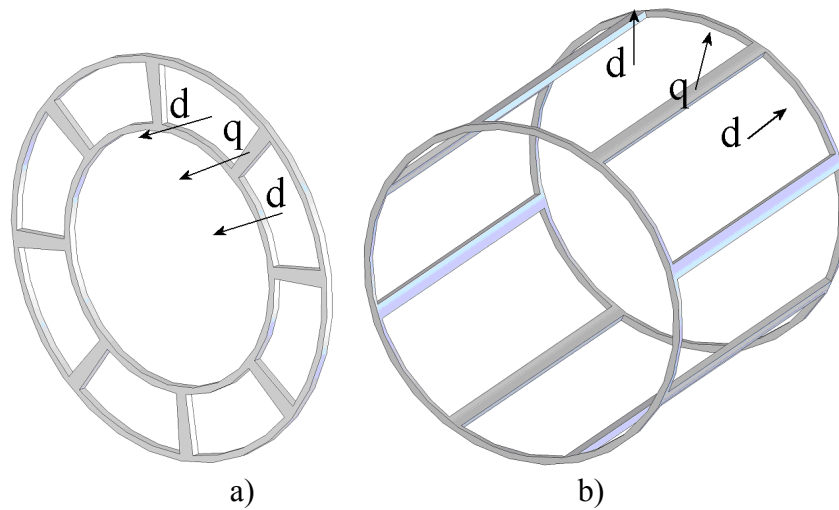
Installation jigs for permanent magnets for a) axial and b) radial flux permanent magnet synchronous machines. Installation jig forms a coarse squirrel cage provided with end rings. Note that in such a case the damper bars surrounding the d-axis are effective but the q-axis damping remains quite ineffective.
